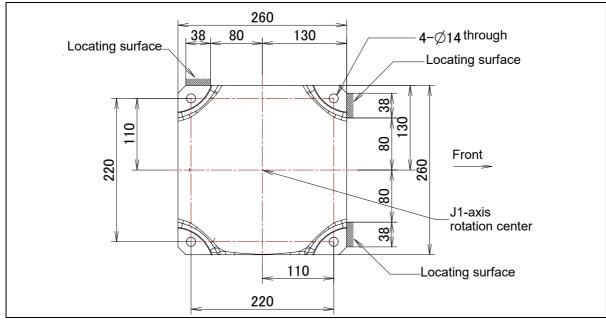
(b) Dimensions of the robot base (M-430iA/2P)
